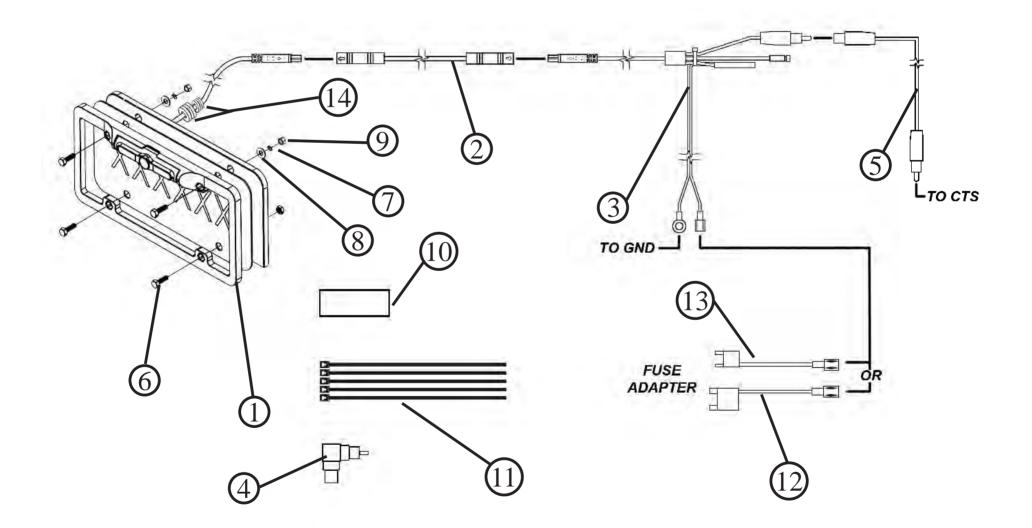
EXPLODED CAMERA ASSEMBLY
